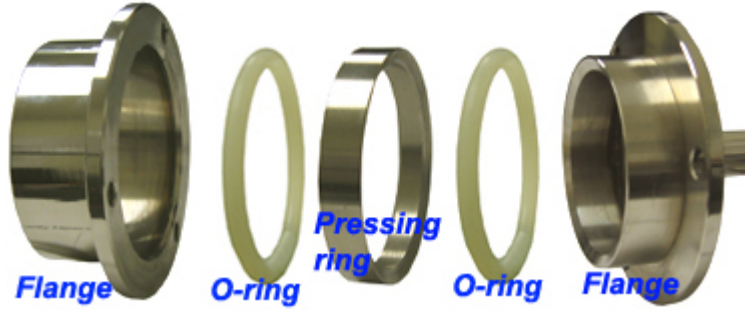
The individual components in the flange assembly. Obtained from: [57].
